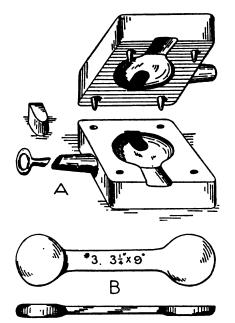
FORMER AND BLANK FOR WRENCH FORGING.
